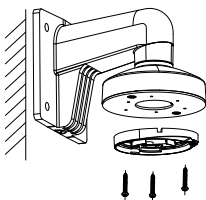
Fix the Mounting Base onto the Wall Mount
